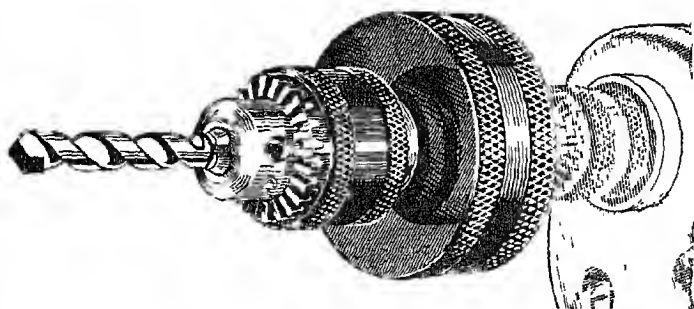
The Mason-Master Safe-D-Speeder reduction gear.
